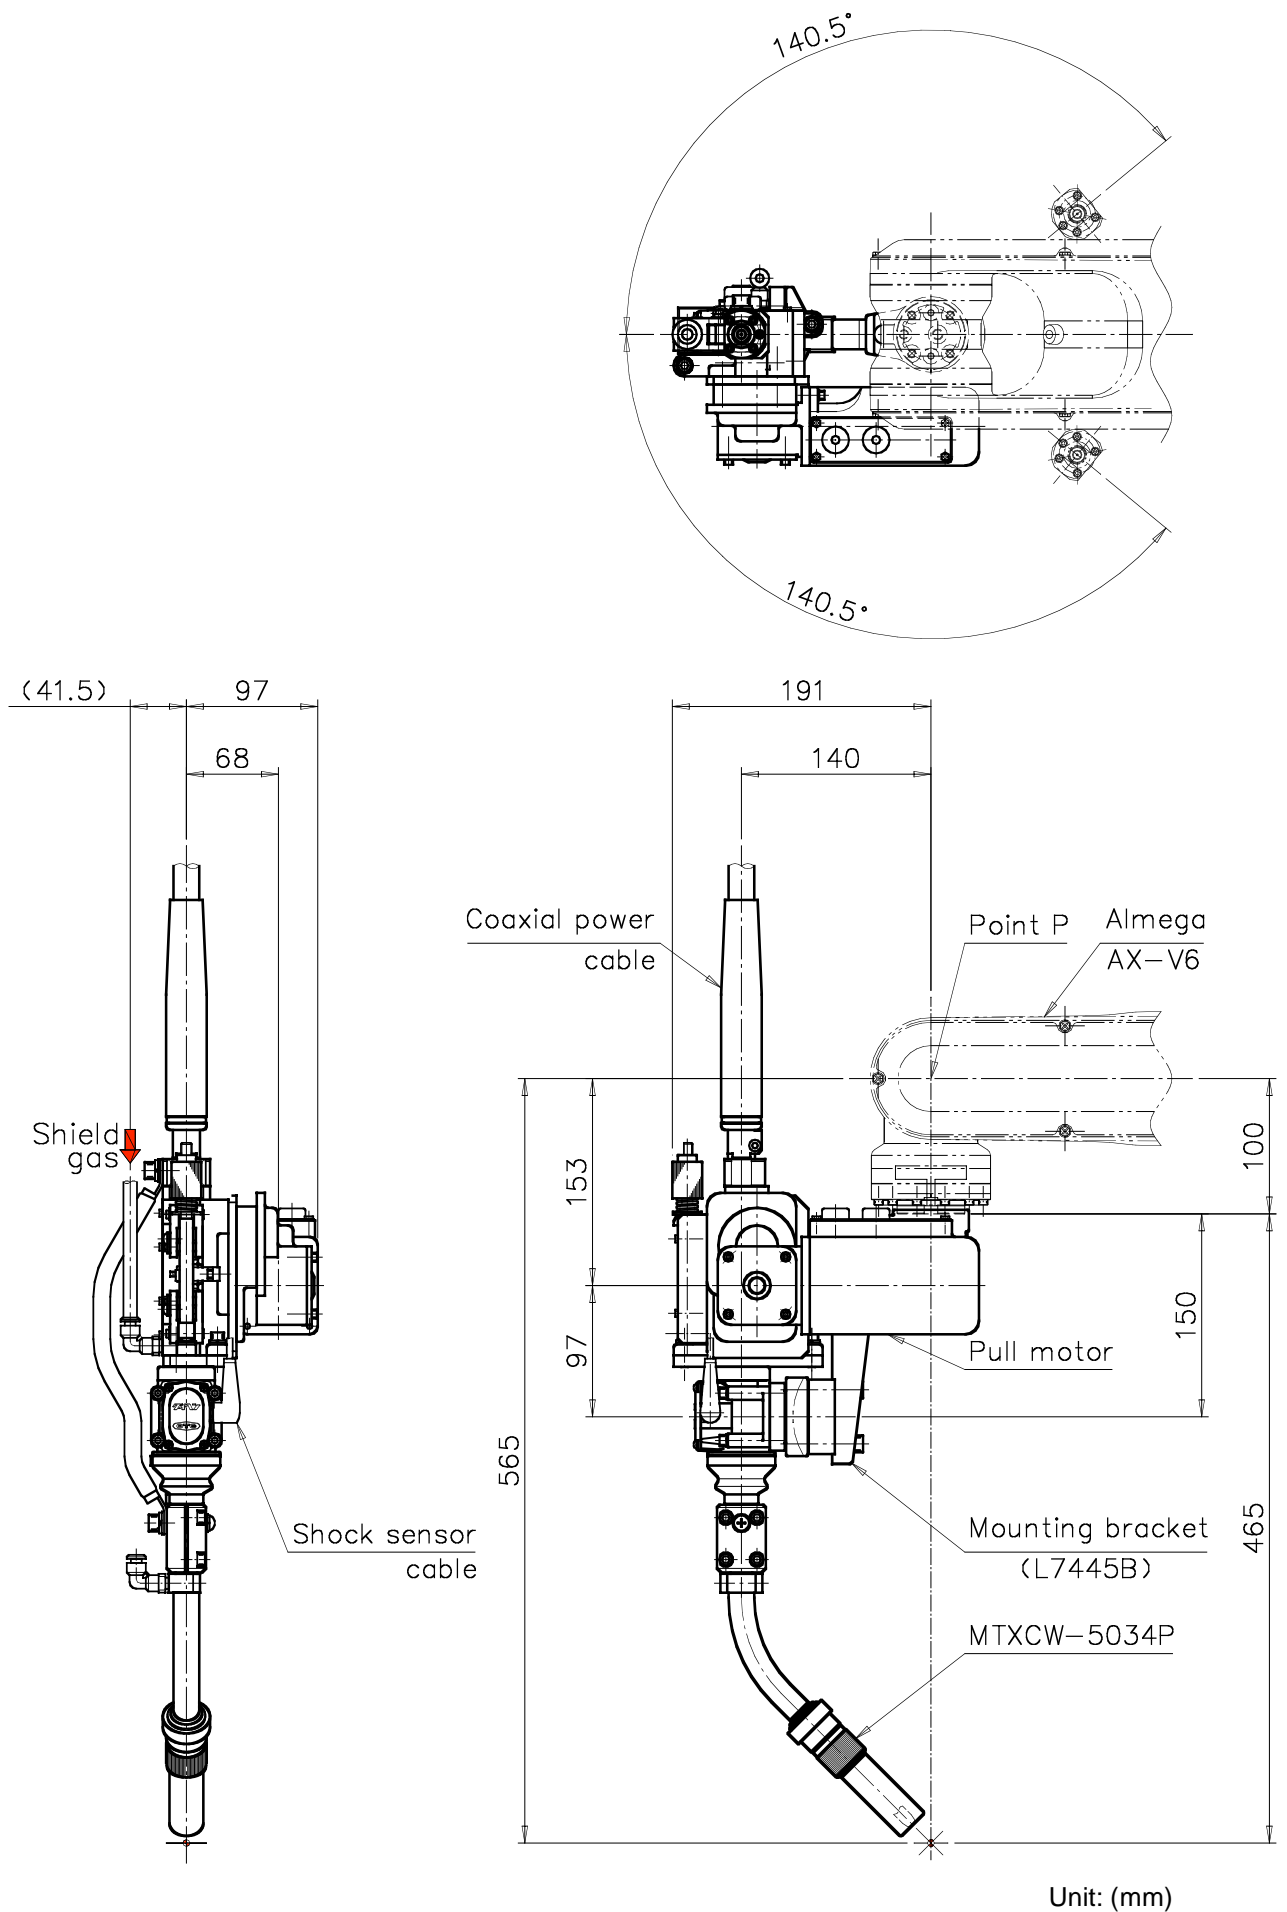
Assembly drawing of MTXCW-5034P and pull feeding unit L-7590/AFPS-4311
